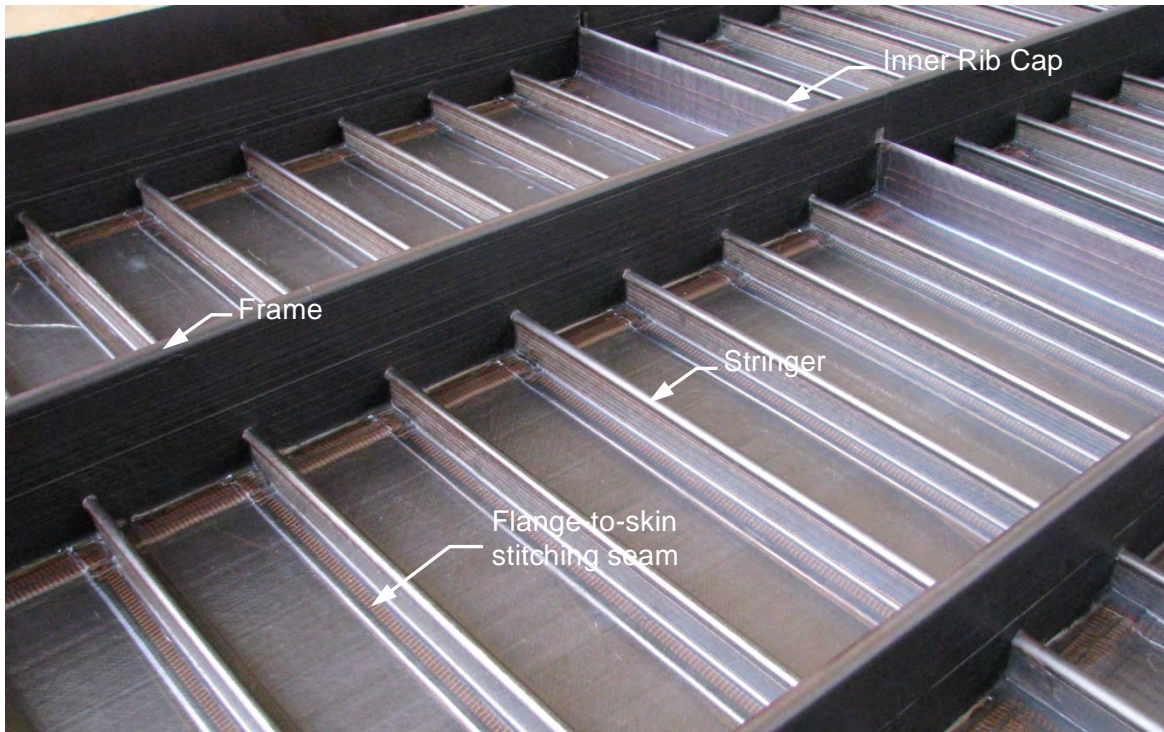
Resin-Infused and Cured Crown Panel Before Periphery Machining
